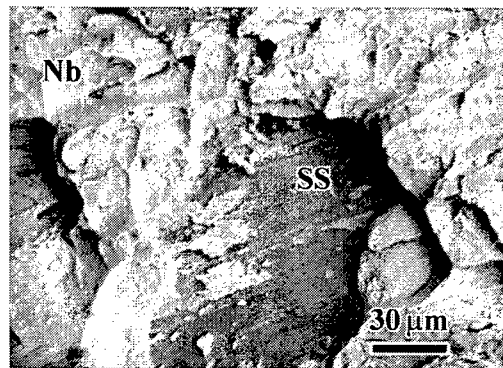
Fractograph of Ti/Nb/SS IFR weld. Fracture was through the Nb interlayer region.
